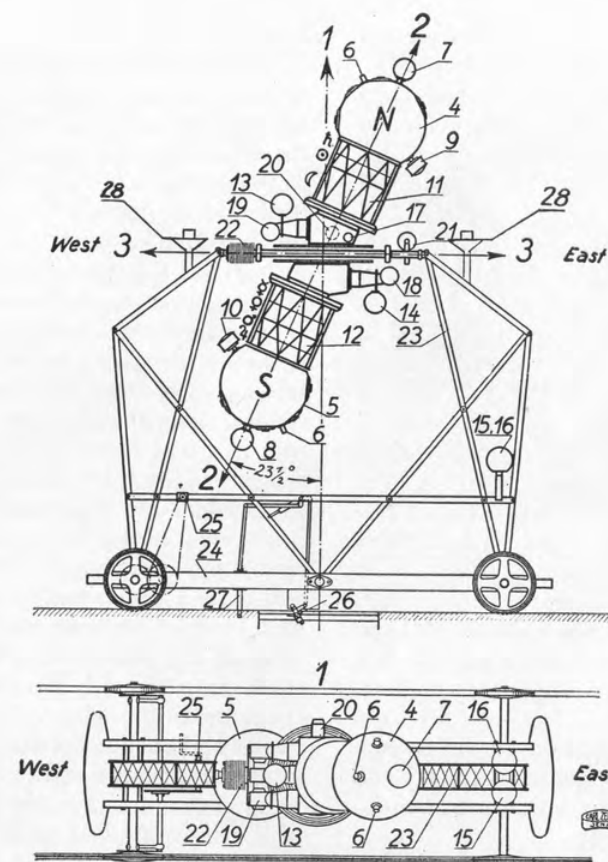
DIAGRAM OF THE PLANETARIUM INSTRUMENT IN PLAN AND ELEVATION.
